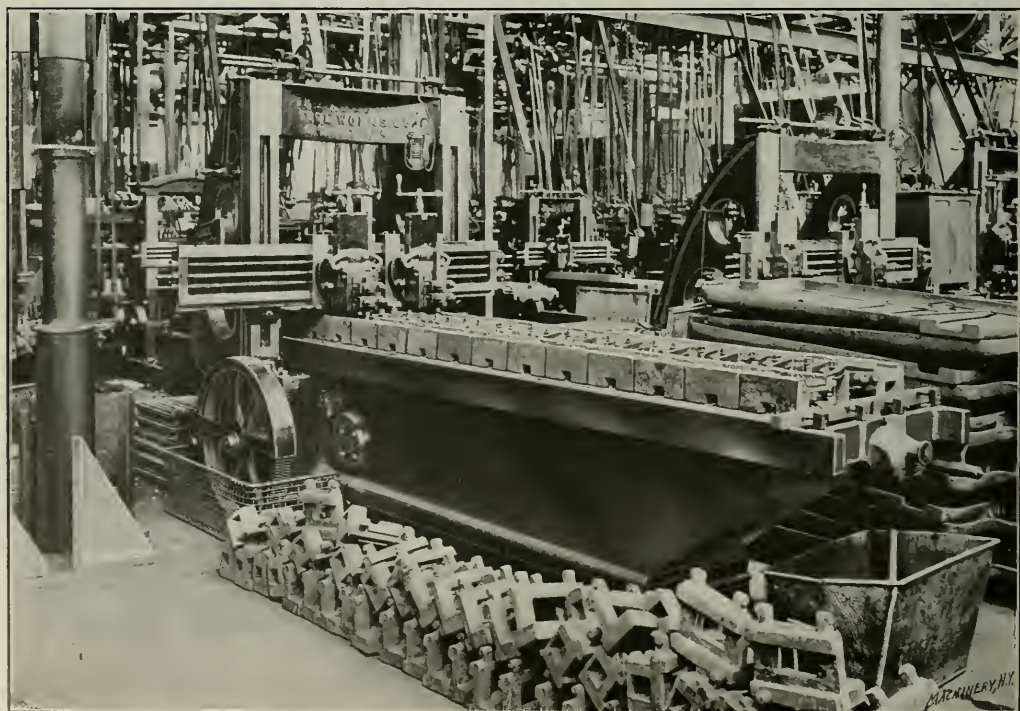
Planing Cutting Off Slides for Turret Lathes.
